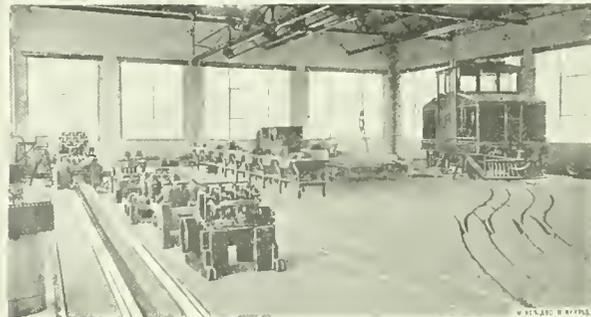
GASOLINE ENGINE AND LOCOMOTIVE TEST HOUSE
